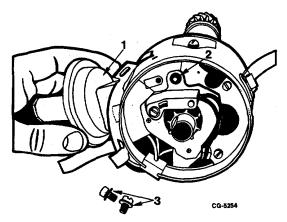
Removing Vacuum Advance Diaphragm Assembly.
